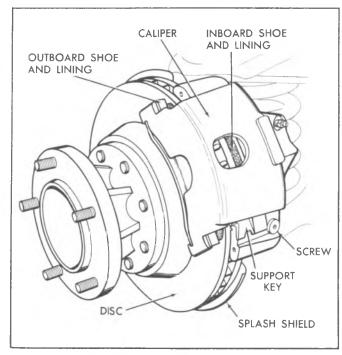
Bendix Disc Brake Caliper Assembly
